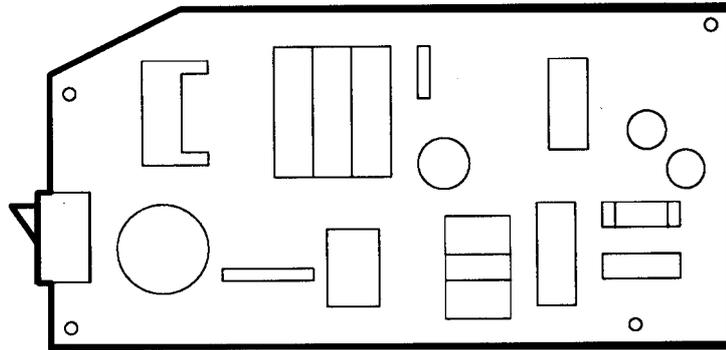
C106 PSB-B/PSE-B Board Component Layout
